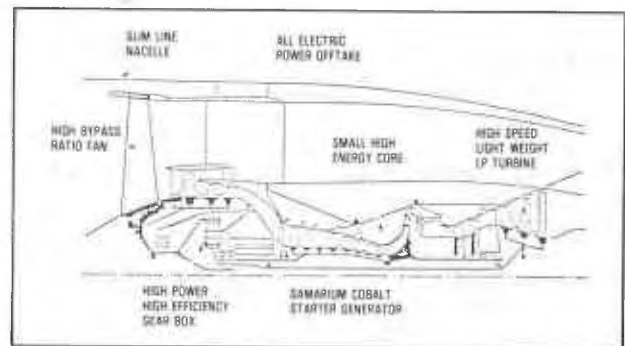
Engine Integrated Starter Generator (Courtesy Rolls Royce)
